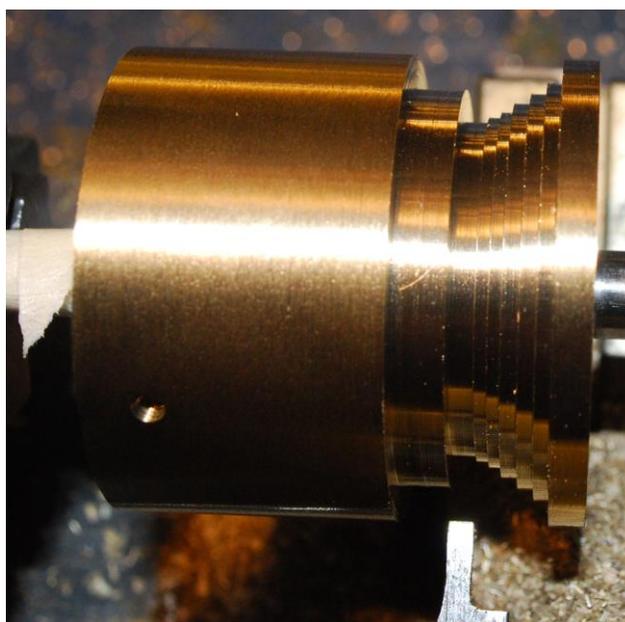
Excess material is removed to the left of the parting tool since the depth of cut has exceeded the length of the tool.
